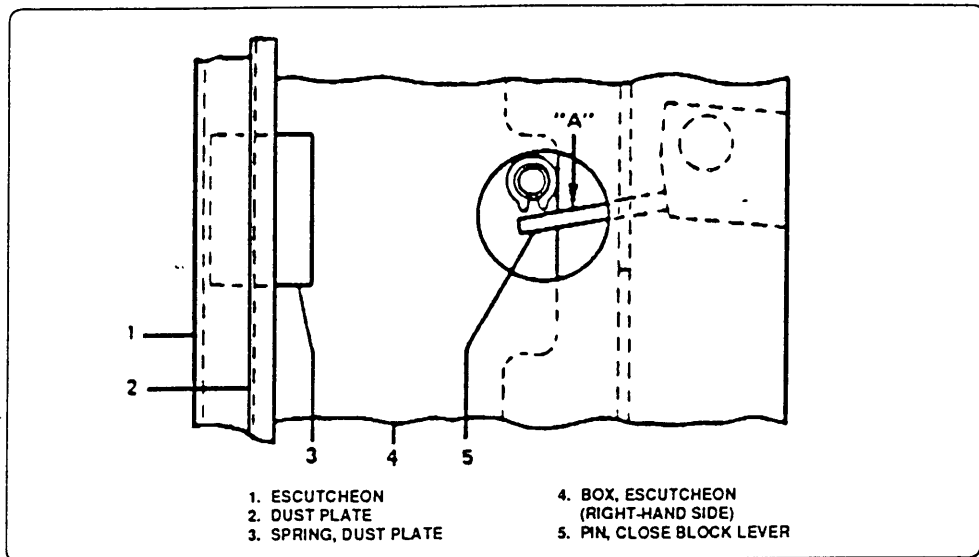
PARTIAL VIEW OF ESCUTCHEON ASSEMBLY (RIGHT-HAND SIDE) SHOWING SLOW CLOSE LEVER FOR ELECTRICALLY OPERATED CIRCUIT BREAKERS
